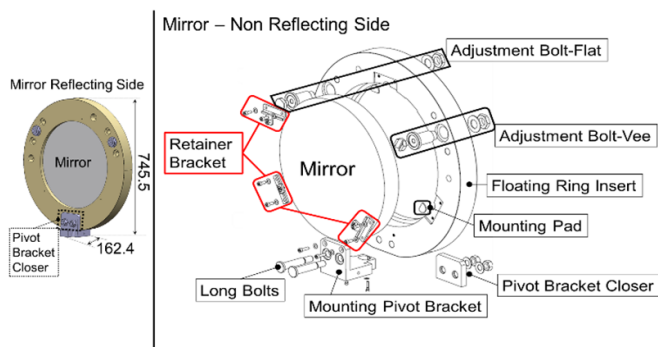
Left: front view of the floating ring assembly with dimensions in millimetres. Right: exploded view of the floating ring insert assembly, mirror and other key parts mentioned in the text. This right-hand side of the image has been enlarged for visualization purposes.
